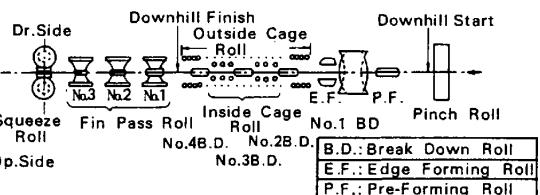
Layout of 26 inch cage forming ERW pipe mill
